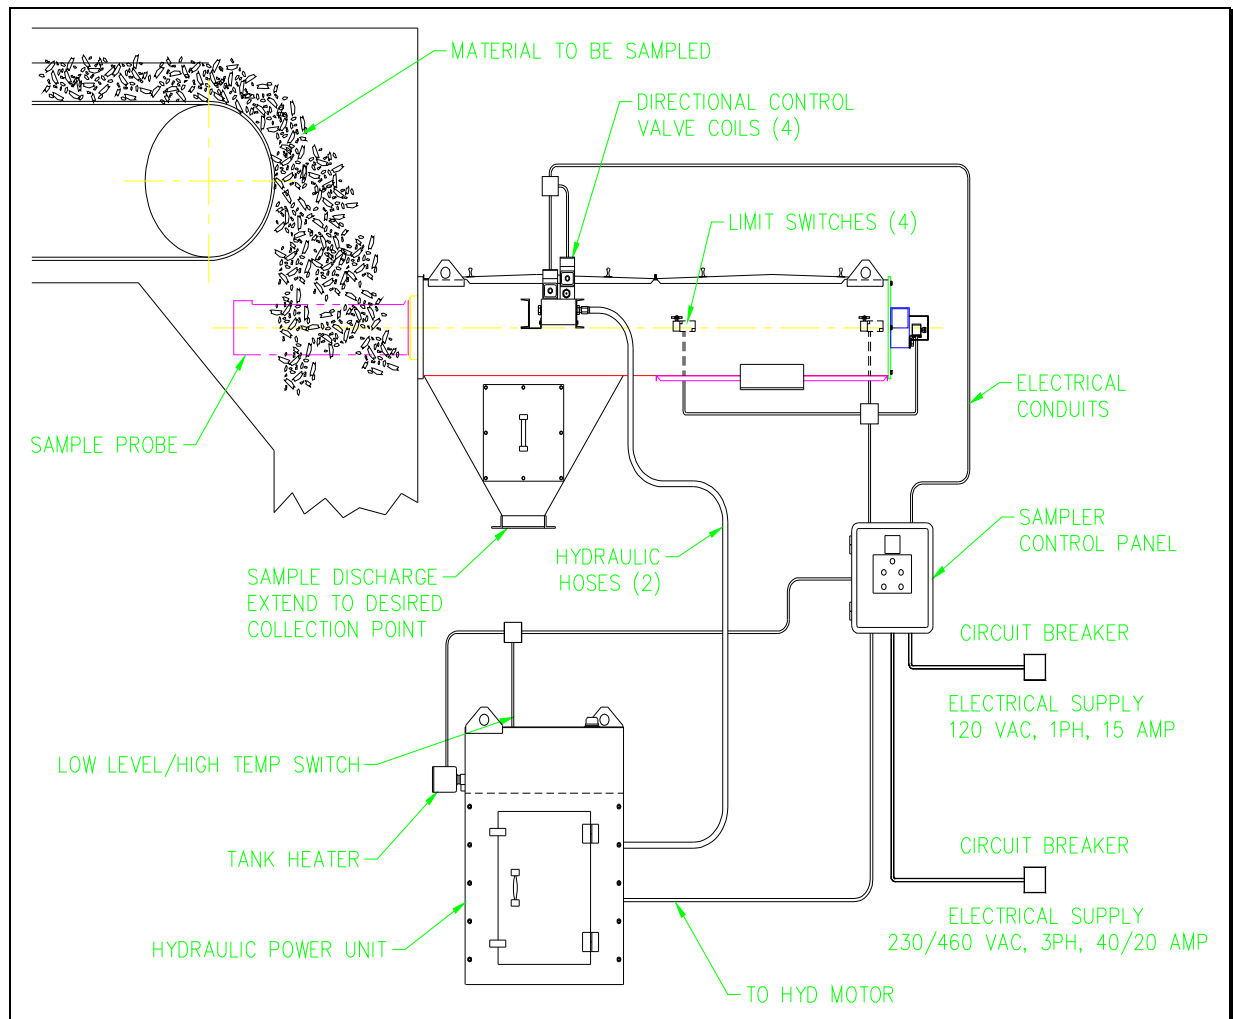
, TYPICAL INSTALLATION, MODEL HD-PRT-HYD SAMPLING SYSTEM
